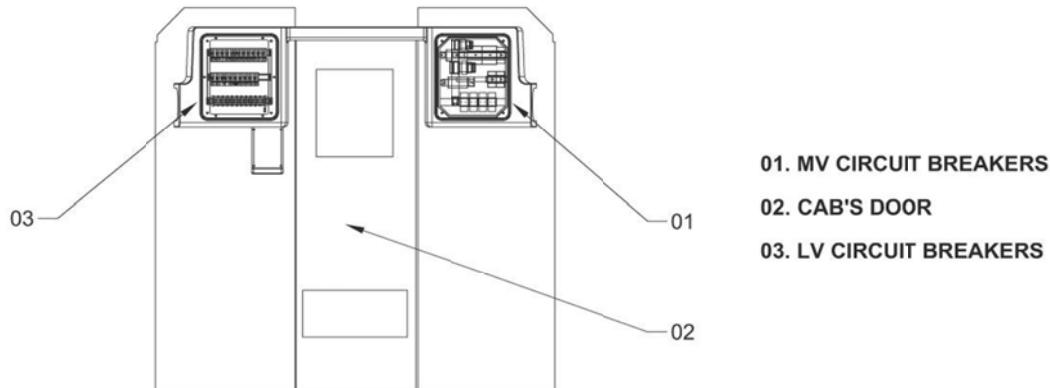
I-02.11 Operator Cab LV-MV CB Panels
